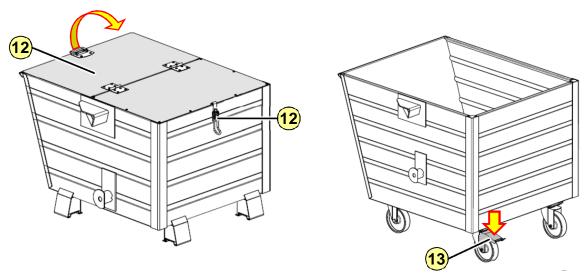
Stacking tipper with cover or steering caster and lock
